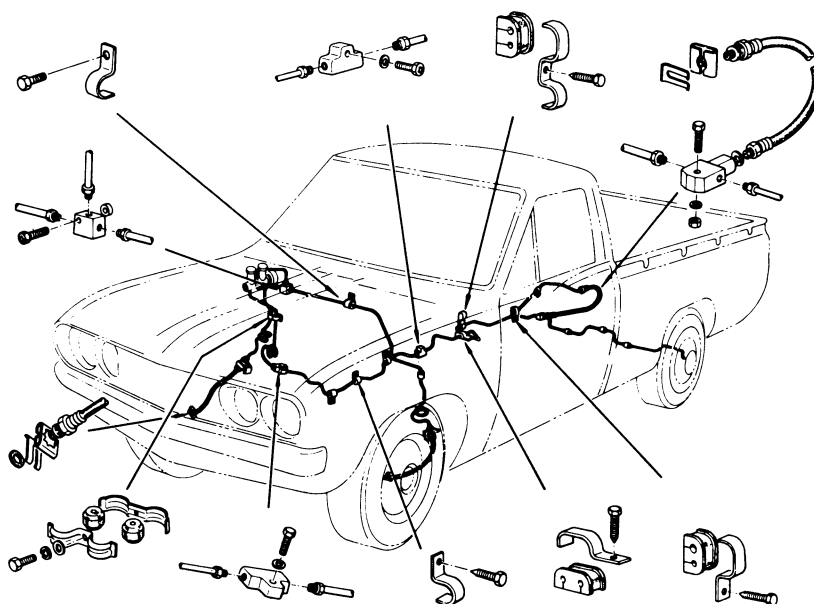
Brake line of R.H. drive (Tandem master cylinder)
